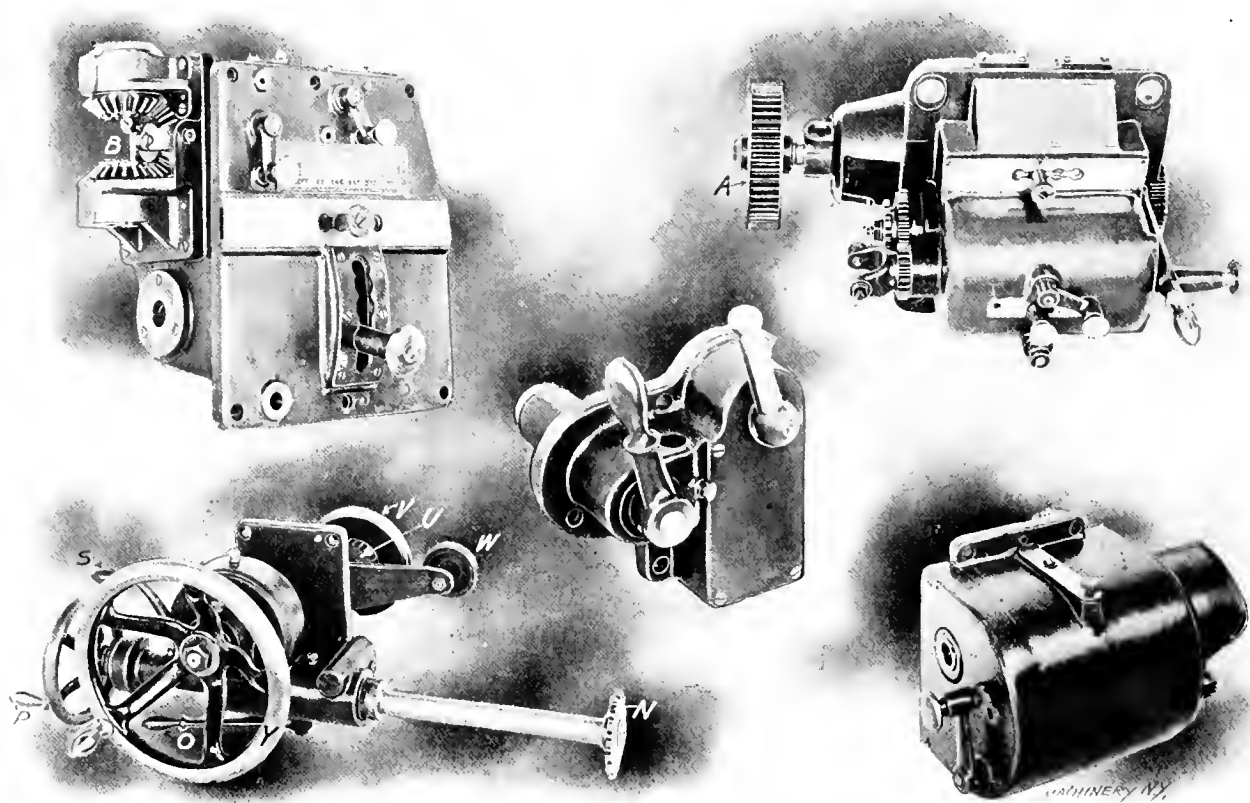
A Group of Assembled Units of the Brown & Sharpe Vertical Miller.
